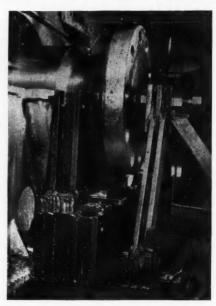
Special jig, fabricated of two-inch welded steel plates, used to support 10-foot bull gear shaft and hold it rigid during machining.
